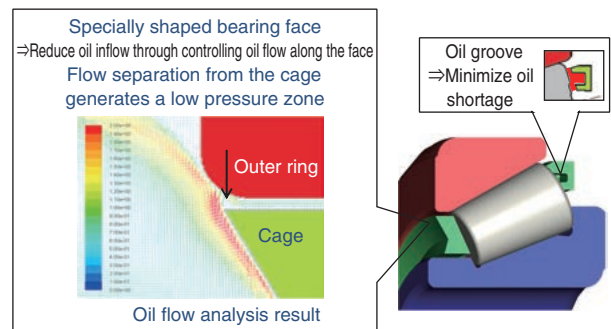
Ultra-low friction torque tapered roller bearing (LFT-IV)
